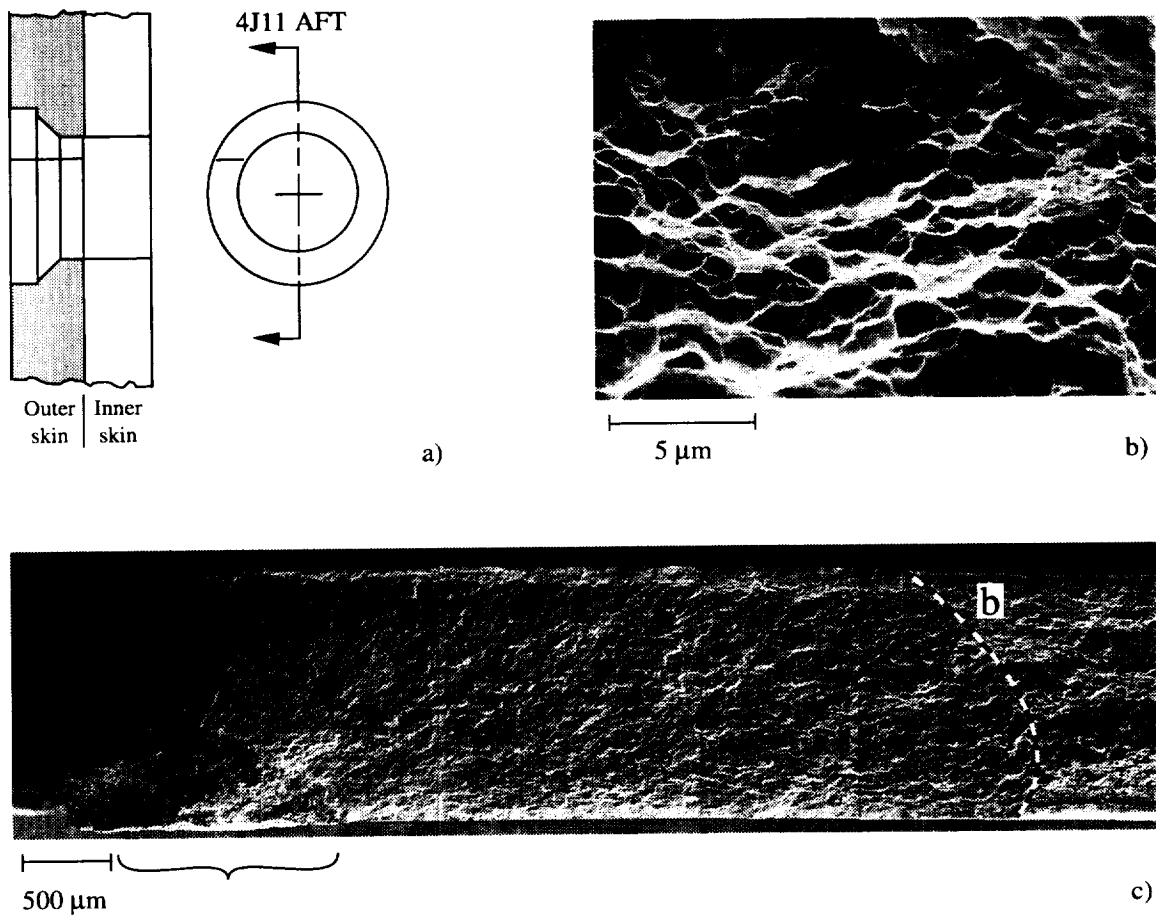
a) The schematic shows the rivet hole 4J11 configuration and the location of the outer skin fatigue crack oriented in the aft direction and about the 10 o'clock position. b) The SEM micrograph shows the ductile tearing morphology of the overload fracture surface at region "b" in Figure 11.26.c. c) The SEM micrograph shows the fatigue crack fracture surface located at the outer skin rivet hole (left). The bracket shows the region of crack initiation along the faying surface and the dashed line marks the fatigue crack front.
